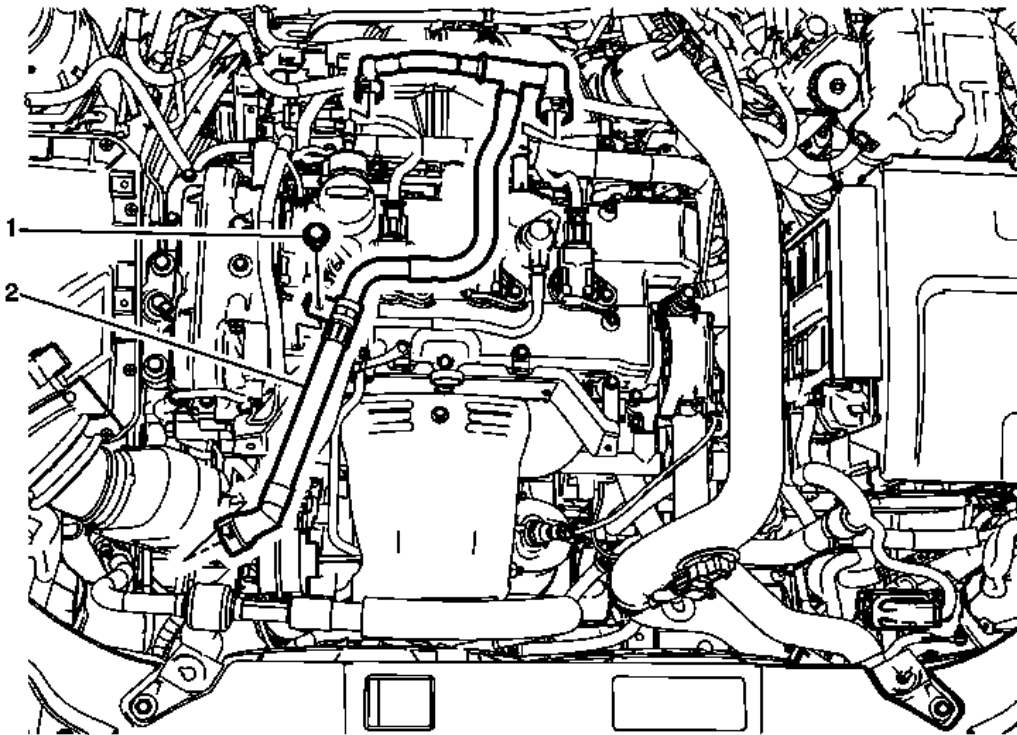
Positive Crankcase Ventilation Hose/Pipe/Tube (Camshaft Cover to Air Cleaner Resonator to Outlet Duct)
